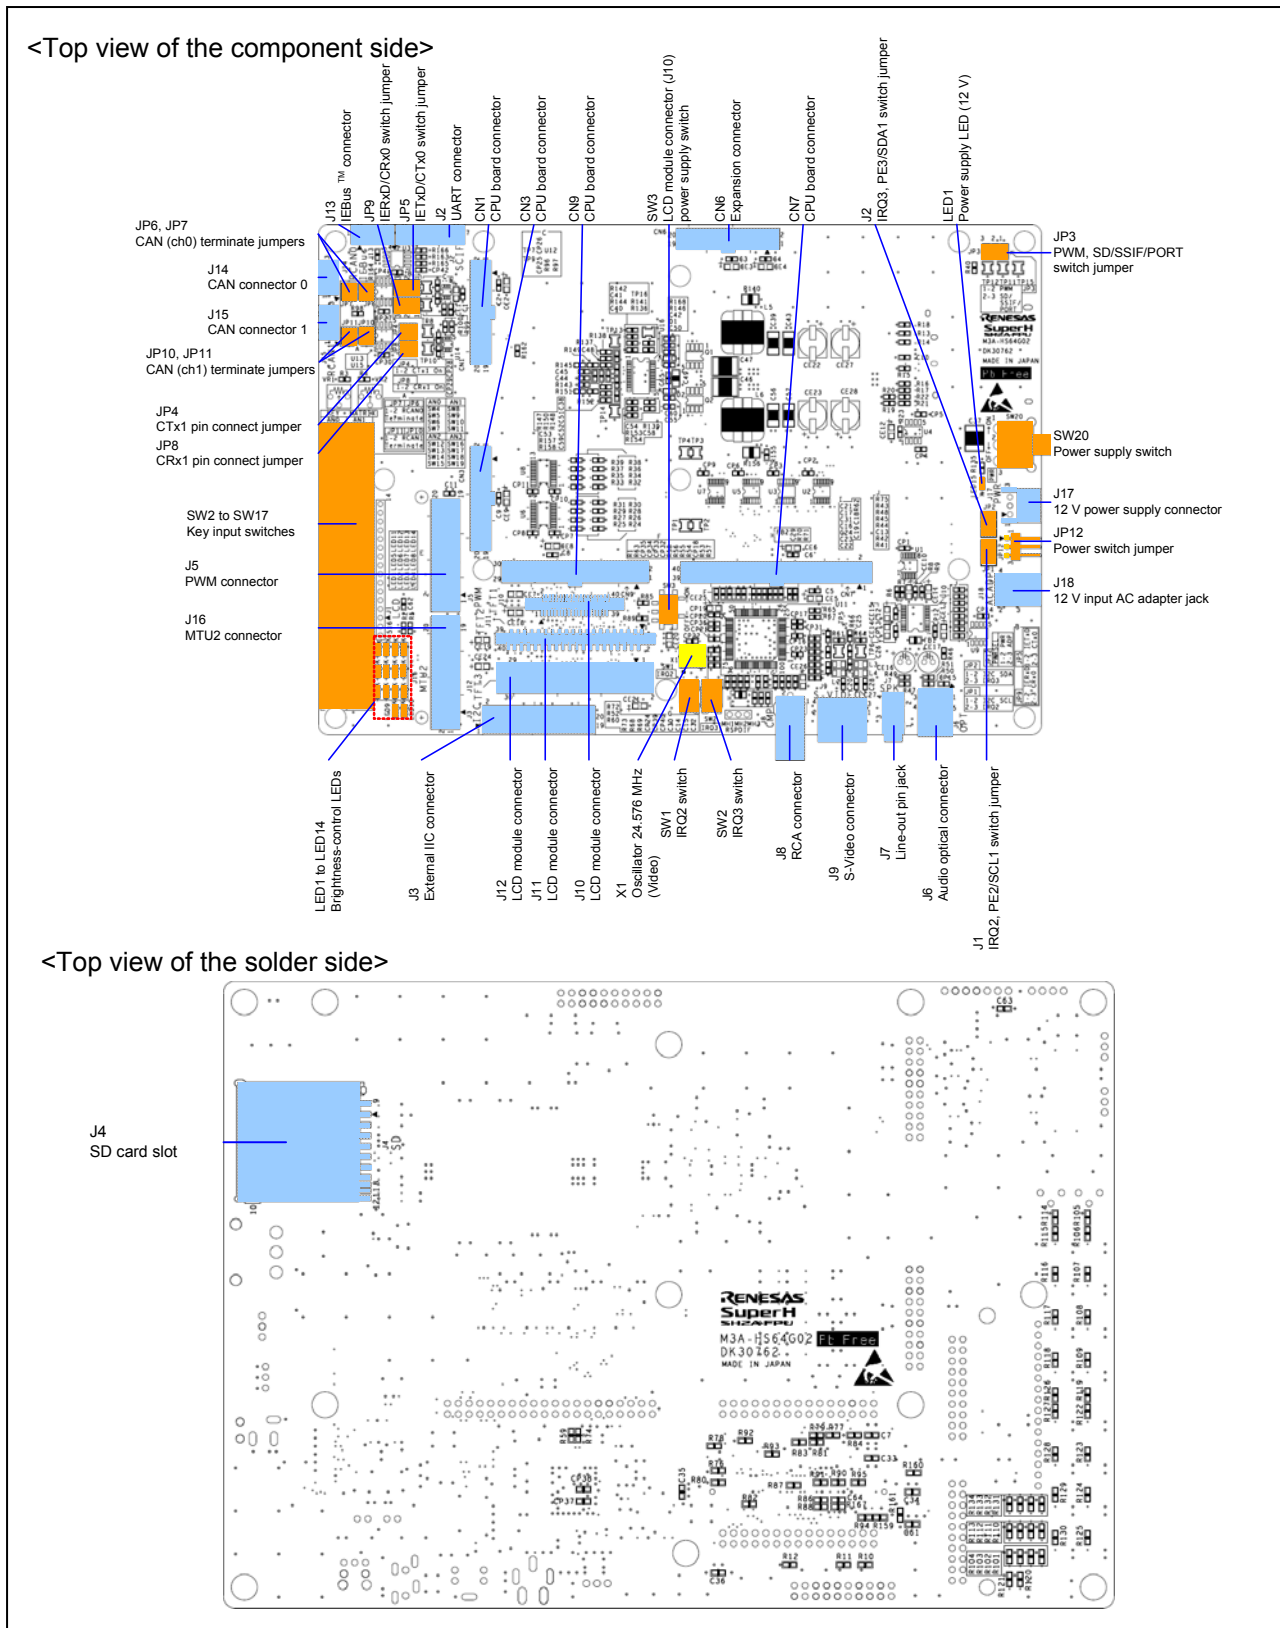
M3A-HS64G02 Layout and Component Placement
